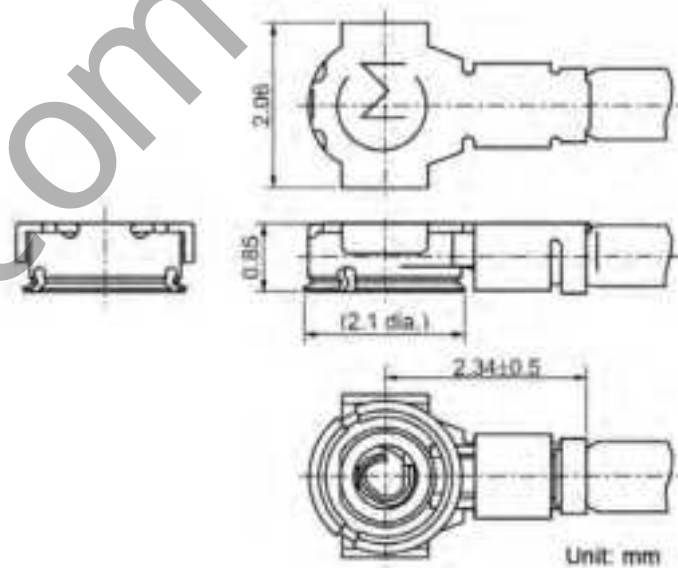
0.81 mm coaxial cable matched RF connector dimensions
